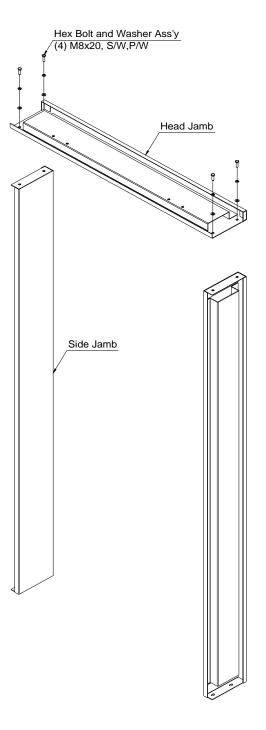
JAMB ASSEMBLY (C.P)
